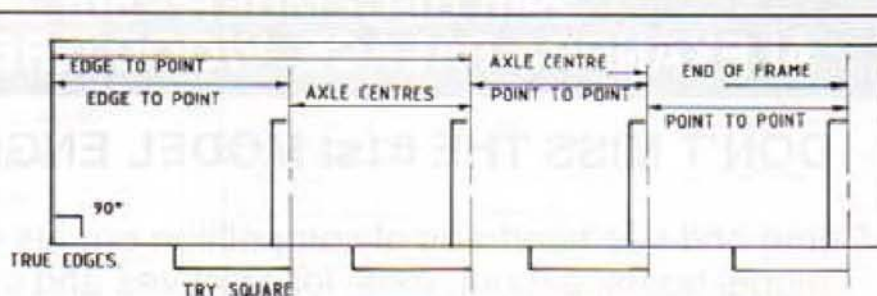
TYPICAL EXAMPLE — MARKING OUT LOCO FRAME
